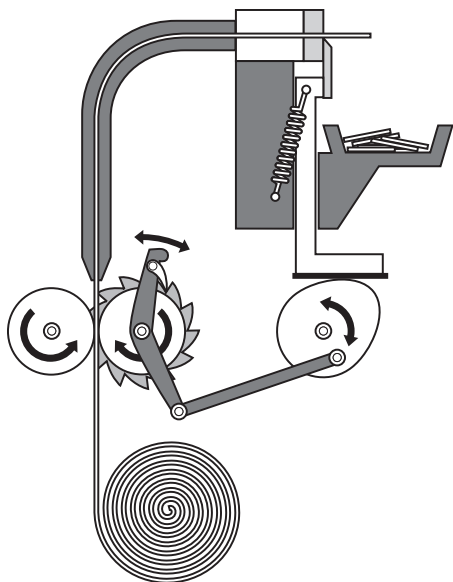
A wire-feeding and -cutting mechanism driven by a single motor. The four-link mechanism and the ratchet transmit motion to the friction rollers to draw the wire from a spool and the cam drives the blade to cut the wire to a pre-determined length.
